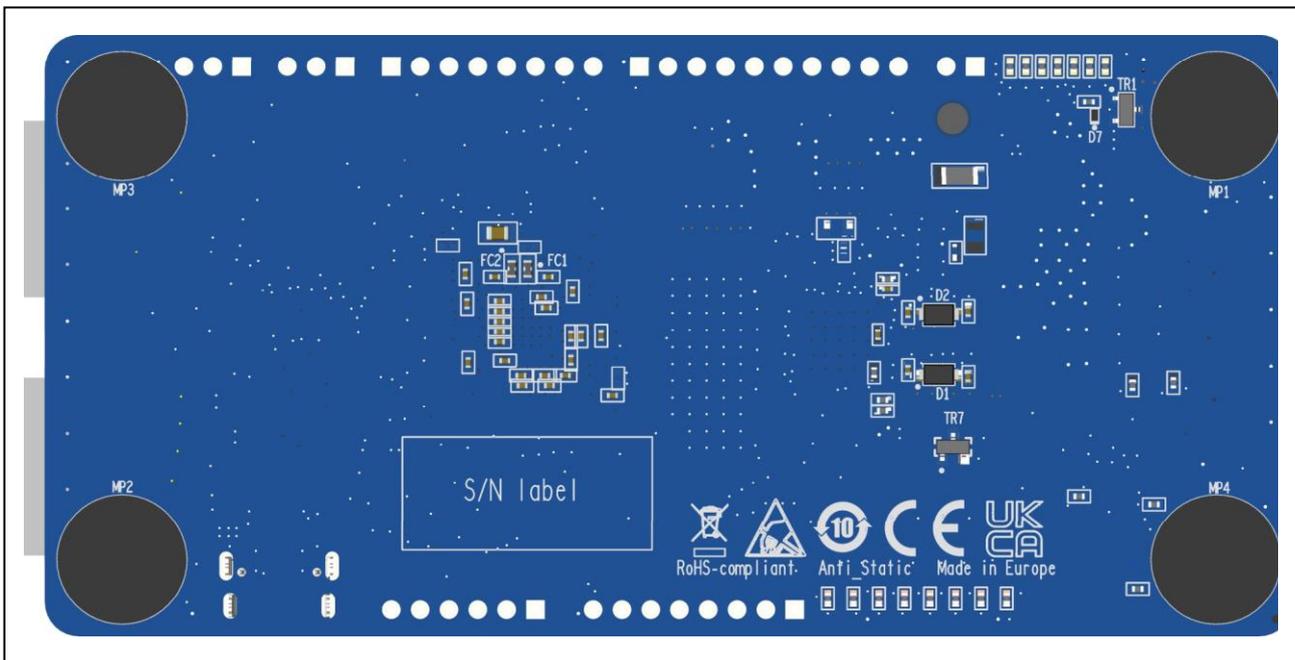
RH850/U2B10 target board with RAA271084 PMIC bottom view for board version D020090_06_V03
